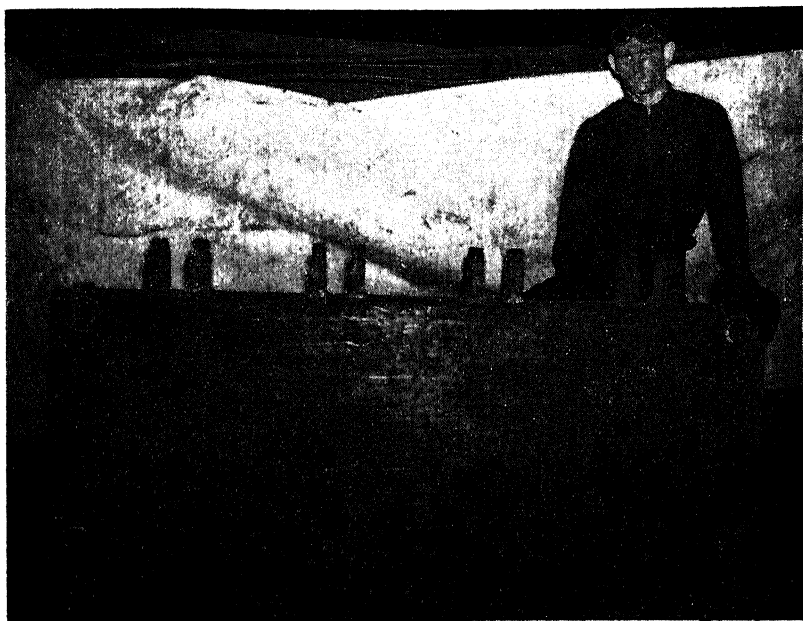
Water-cooled door for discharge end of steel mill slab re-heating furnace. Welded steel saves 1000 lbs. over cast construction. Cooling pipes are built in.
